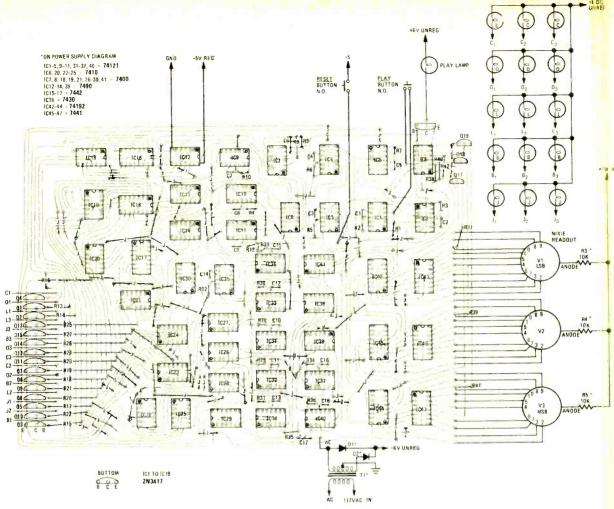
THE BOARD LAYOUT, showing jumpers and leads to components mounted on panel.
